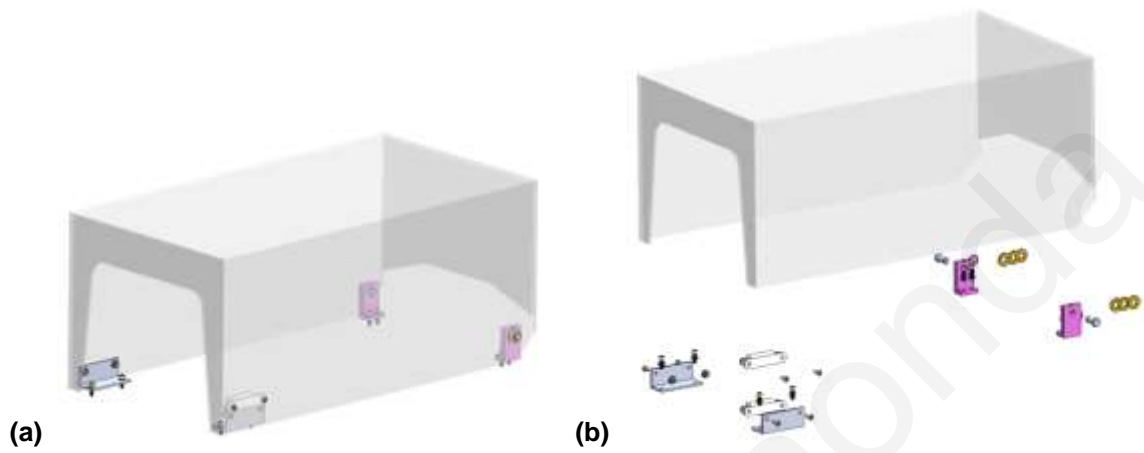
The Sample Base Mechanism assembly in exploded view.
